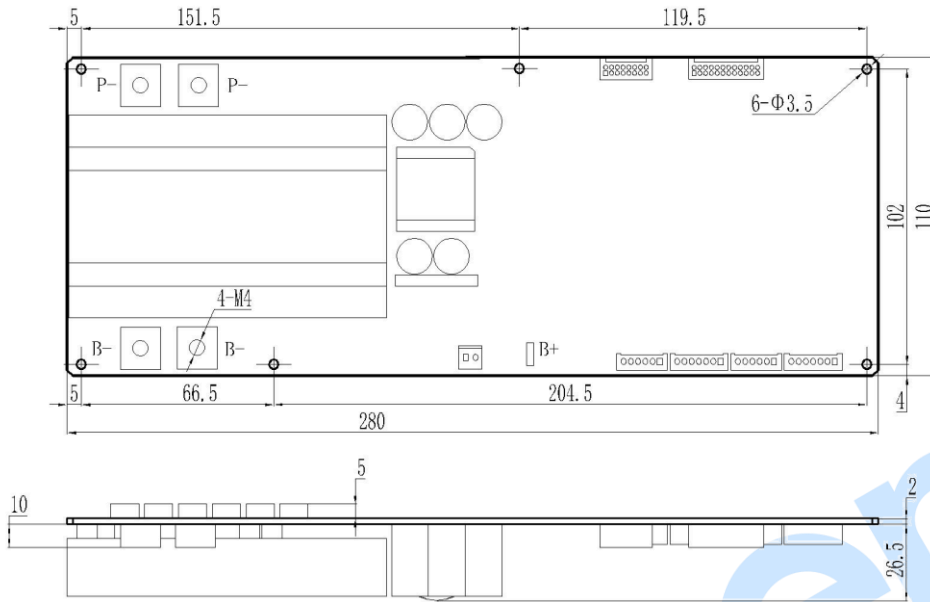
Case Dimensions of HP16S100-10 Protection Board
